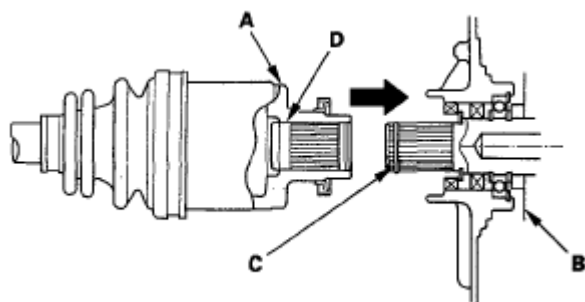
Identifying Inboard Of Driveshaft Into Differential
